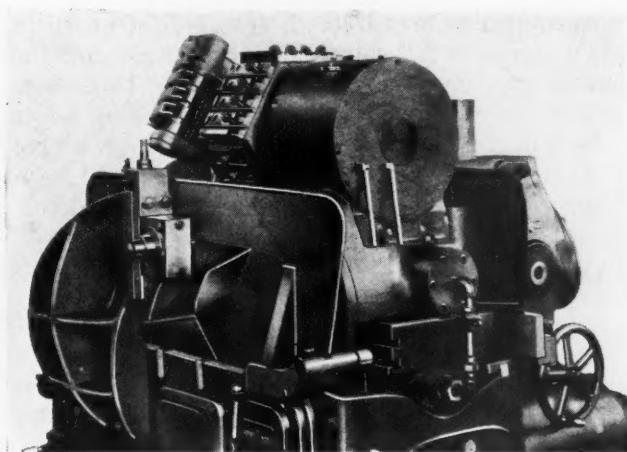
Hydromatic Milling Machine of Standard Design which can be Readily Equipped with Fixtures and Tools for Performing Operations that Might Seem, Off Hand, to Require a Special Machine
